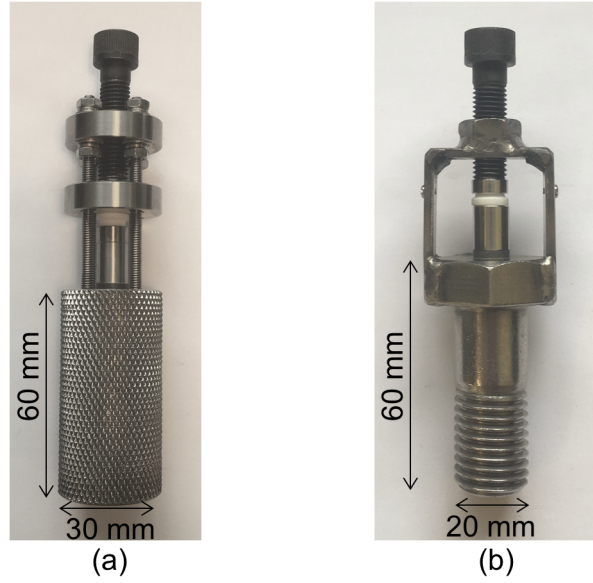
Side view photographs of transducer assembly designs: (a) 30 mm diameter knurled flat end waveguide transducer (Tx1) and (b) M20 bolt flat end waveguide transducer (Tx2).
